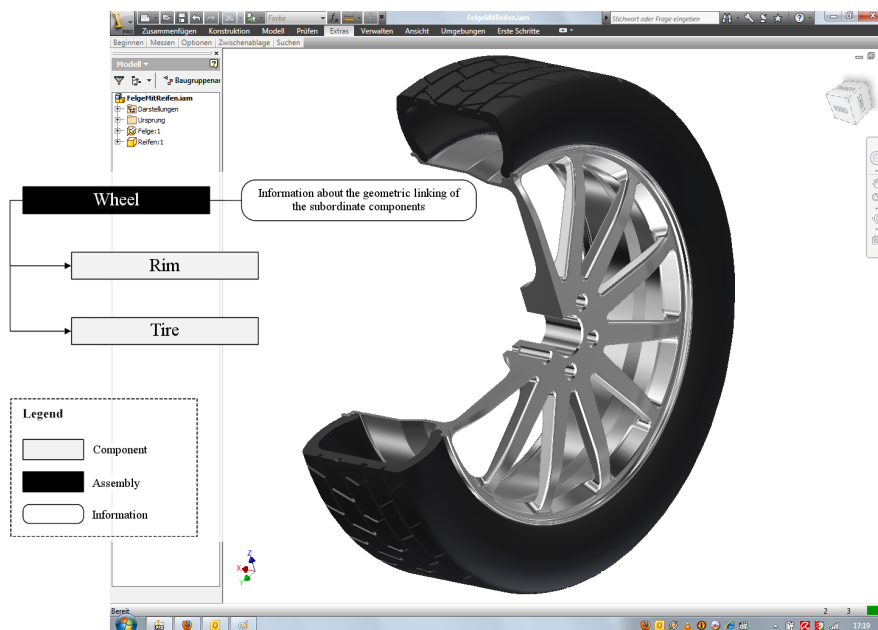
CAD assembly for a wheel comprising the individual components rim and tire
